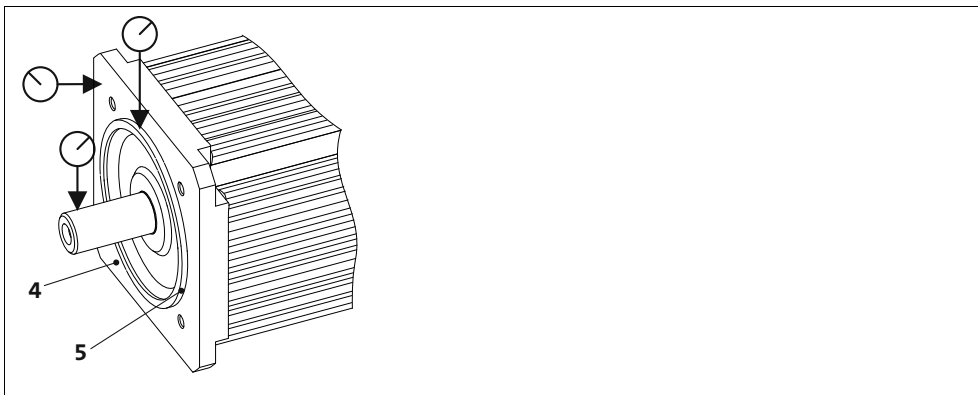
Measurement of the surfaces of smooth running, axial runout and concentricity
